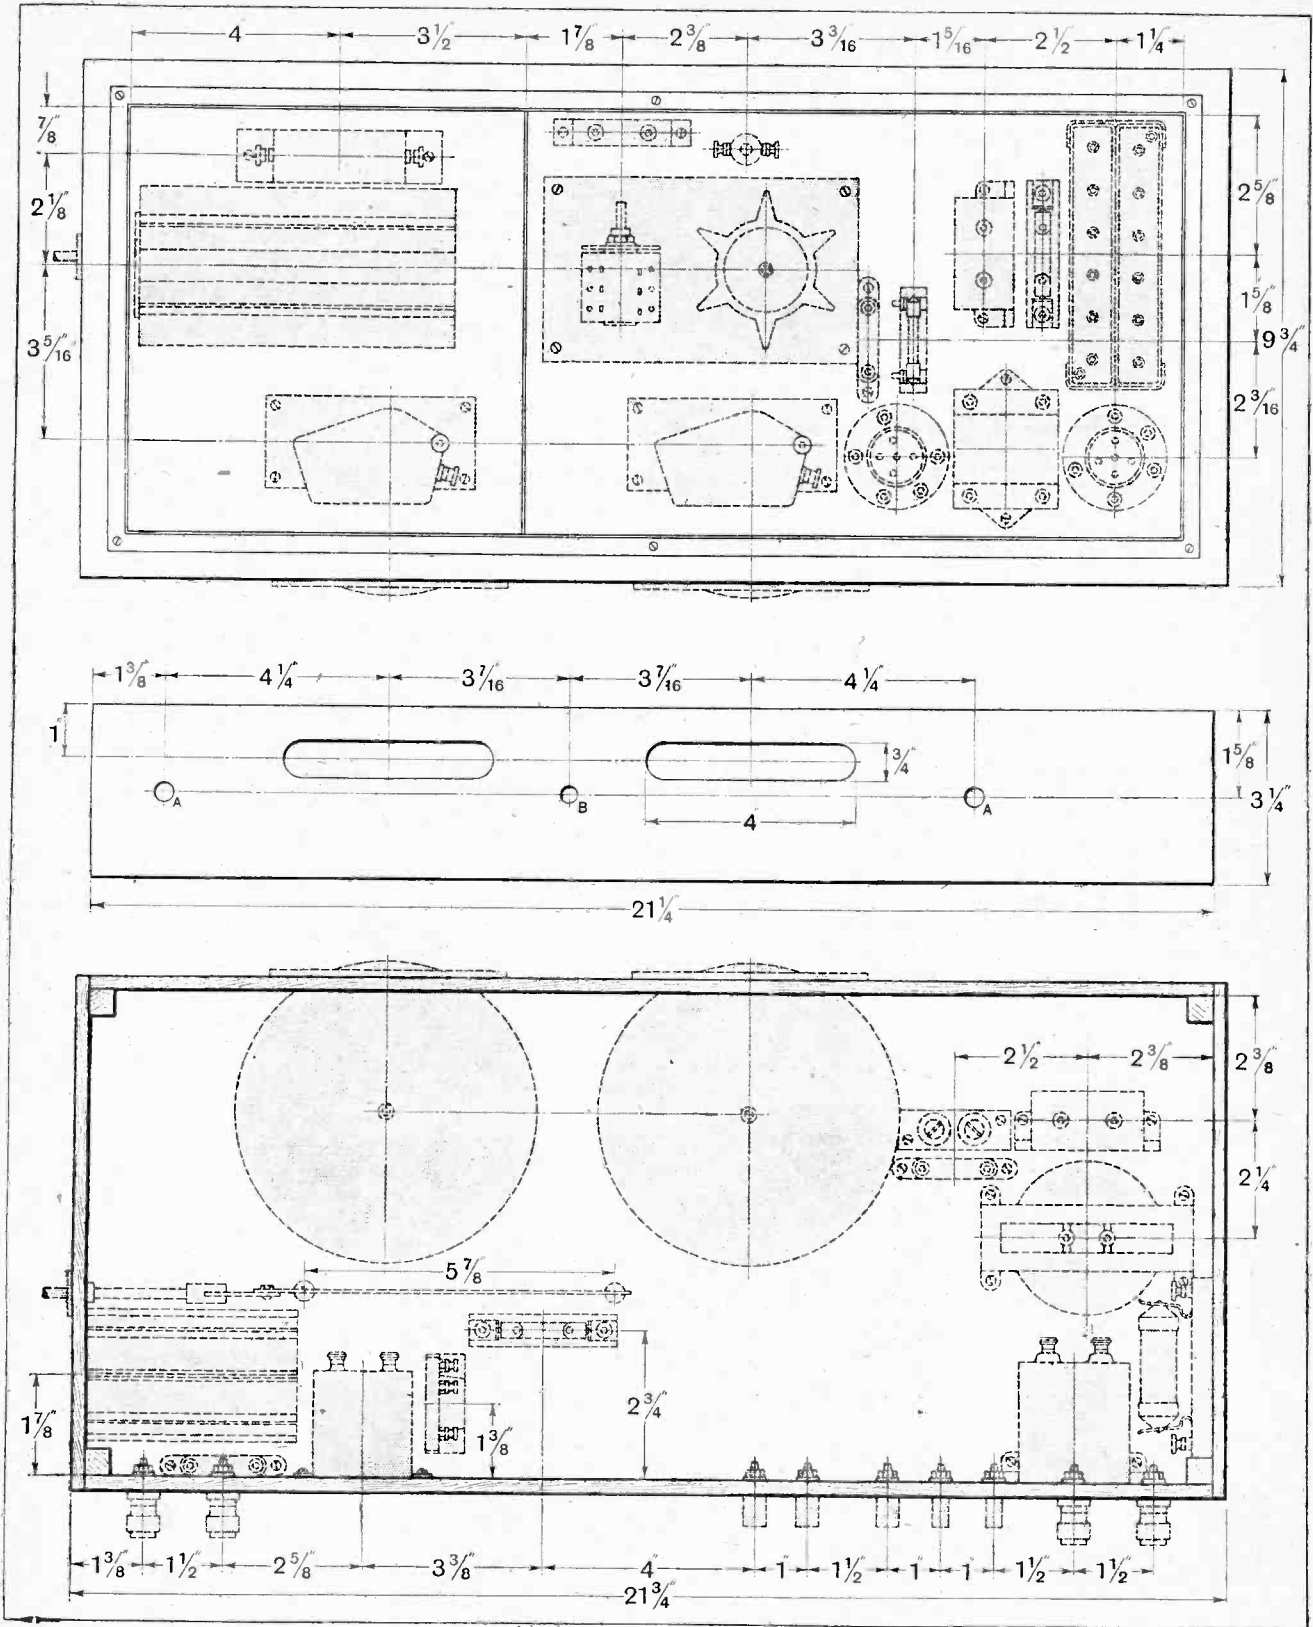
Dimensioned layout of components above and below the receiver panel, A = 3/8in. dia.; B = 5/16in. dia.
